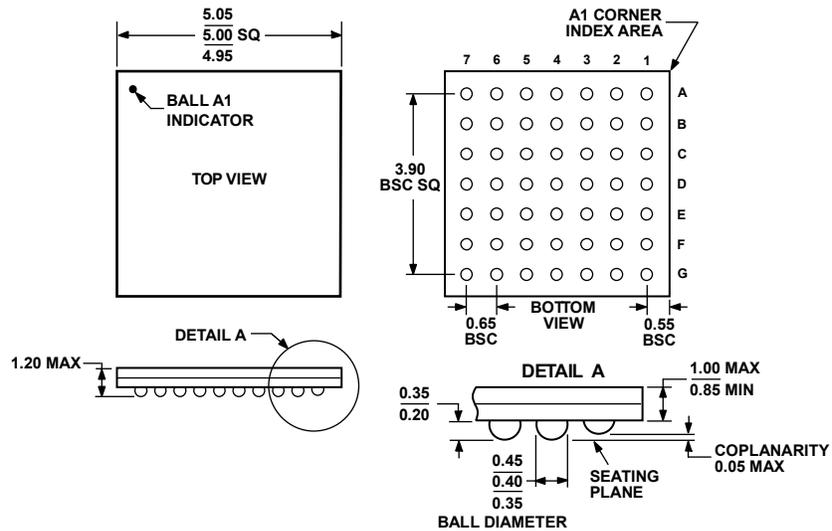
49-Ball Chip Scale Package Ball Grid Array [CSP_BGA]
